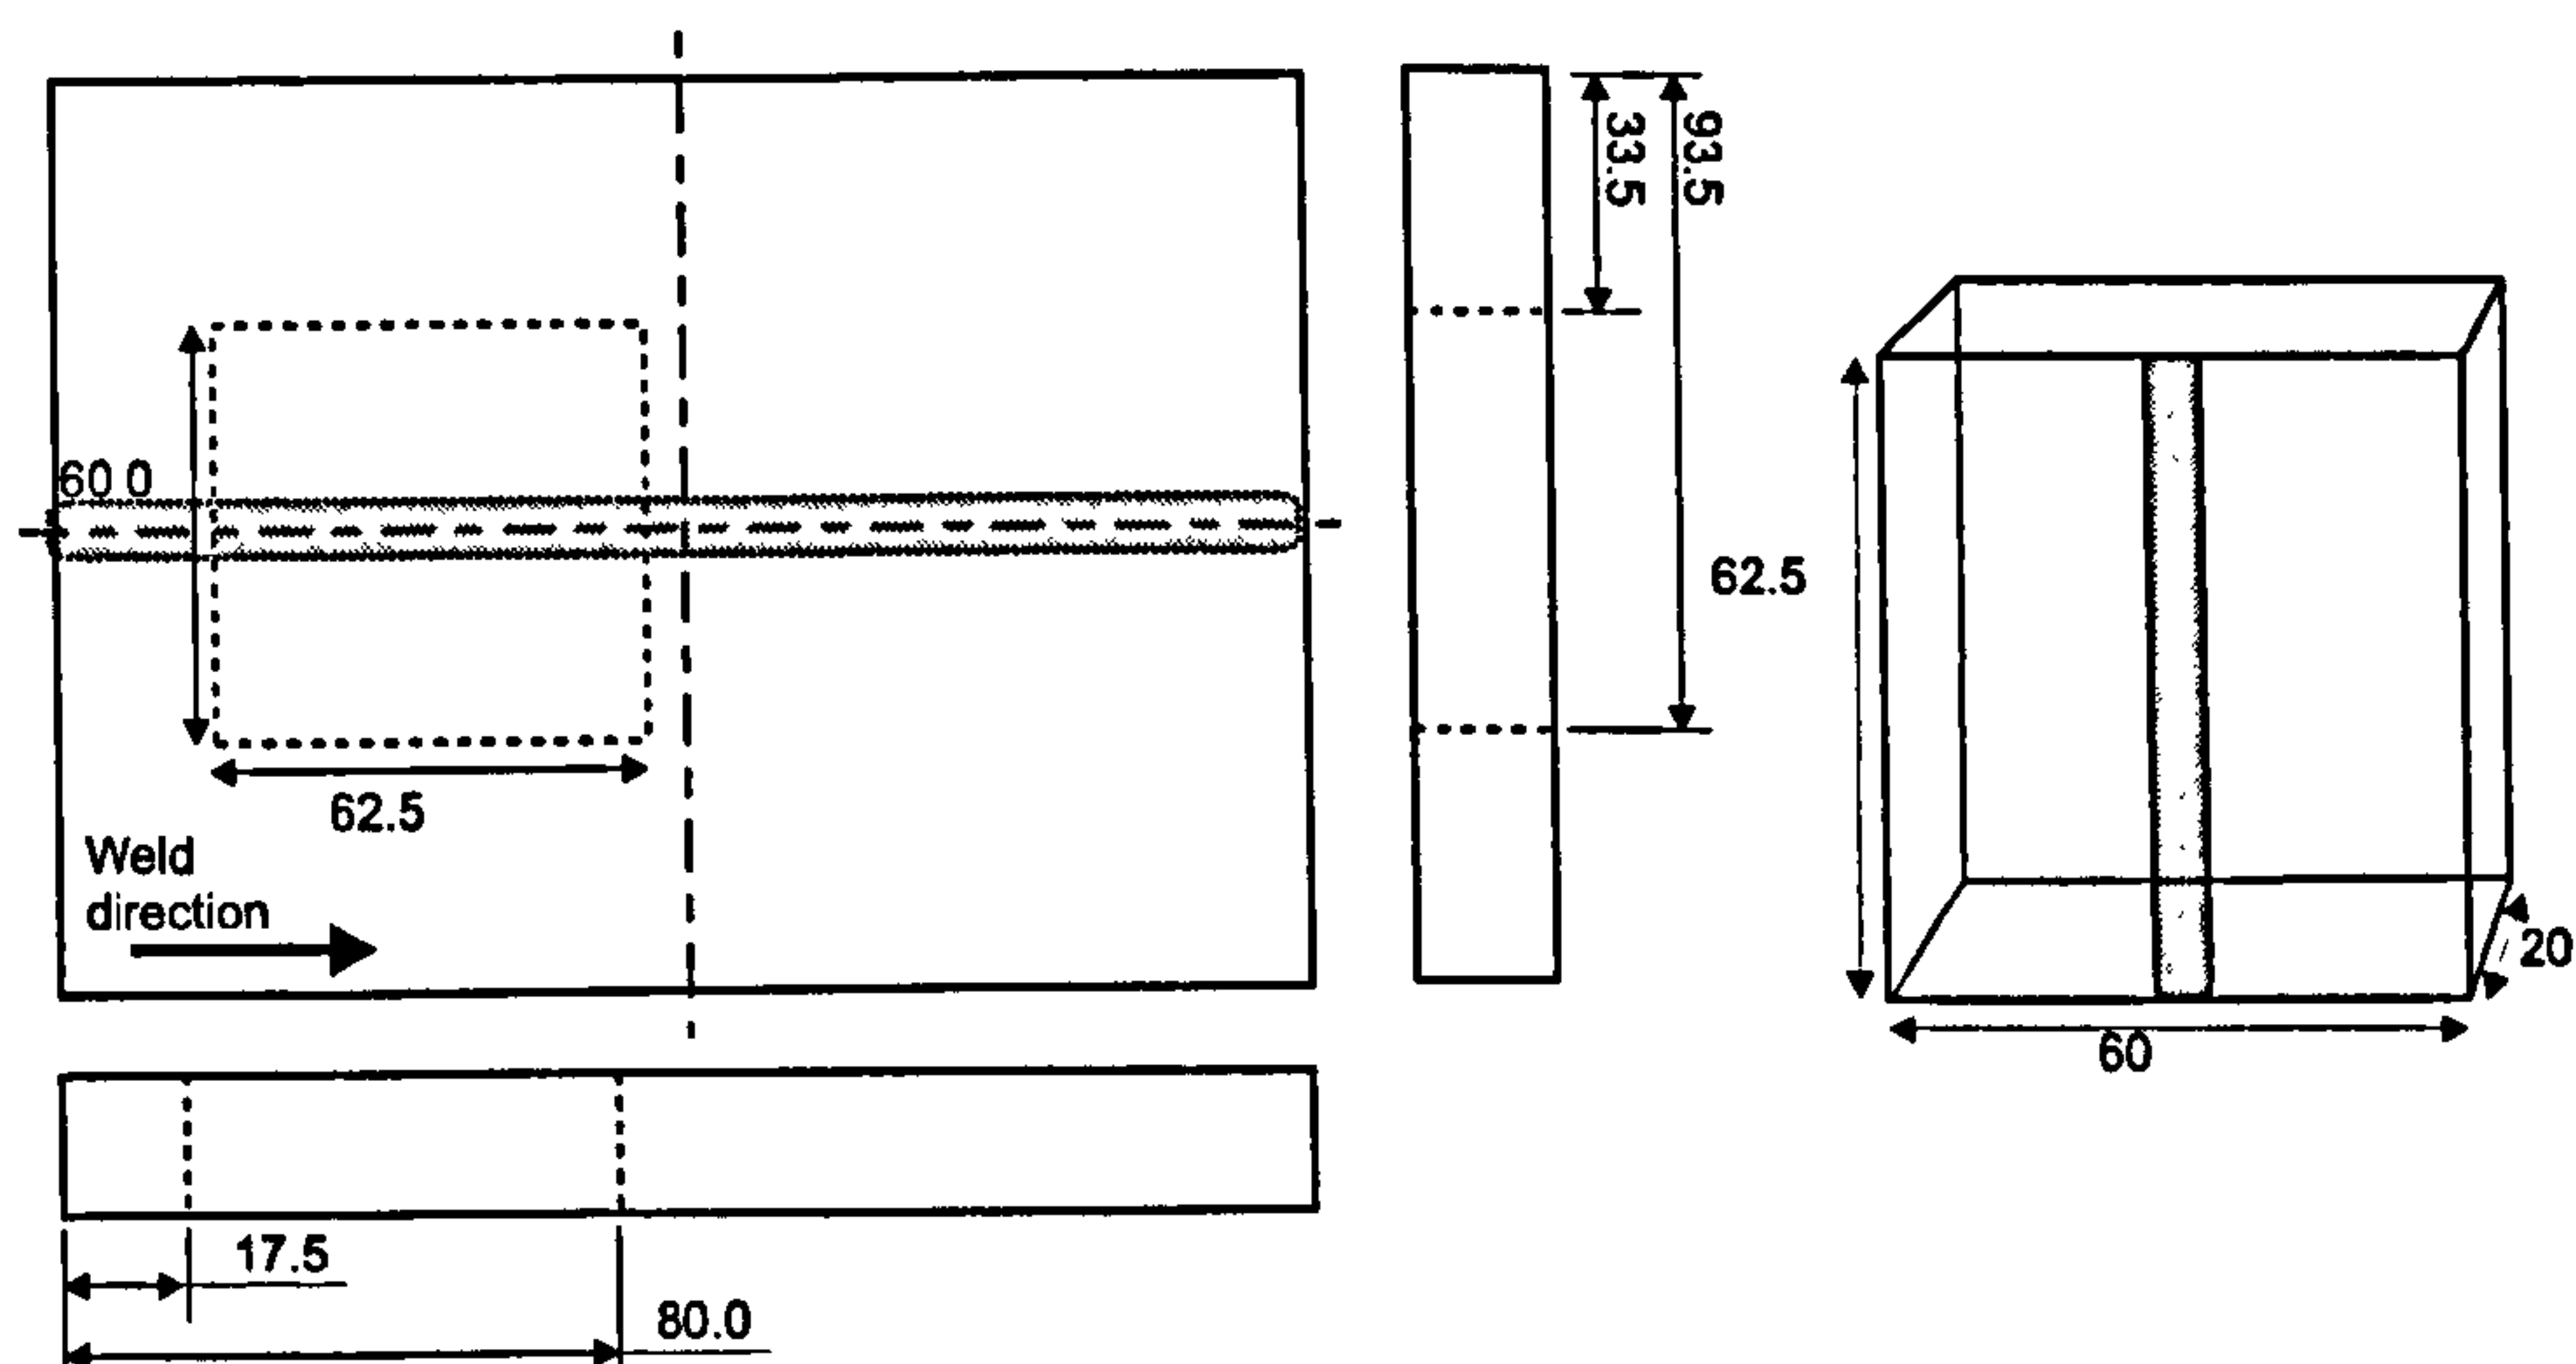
Geometry and extracted specimen locations for autogenously welded 316L austenitic steel plate. Dimensions in mm.
